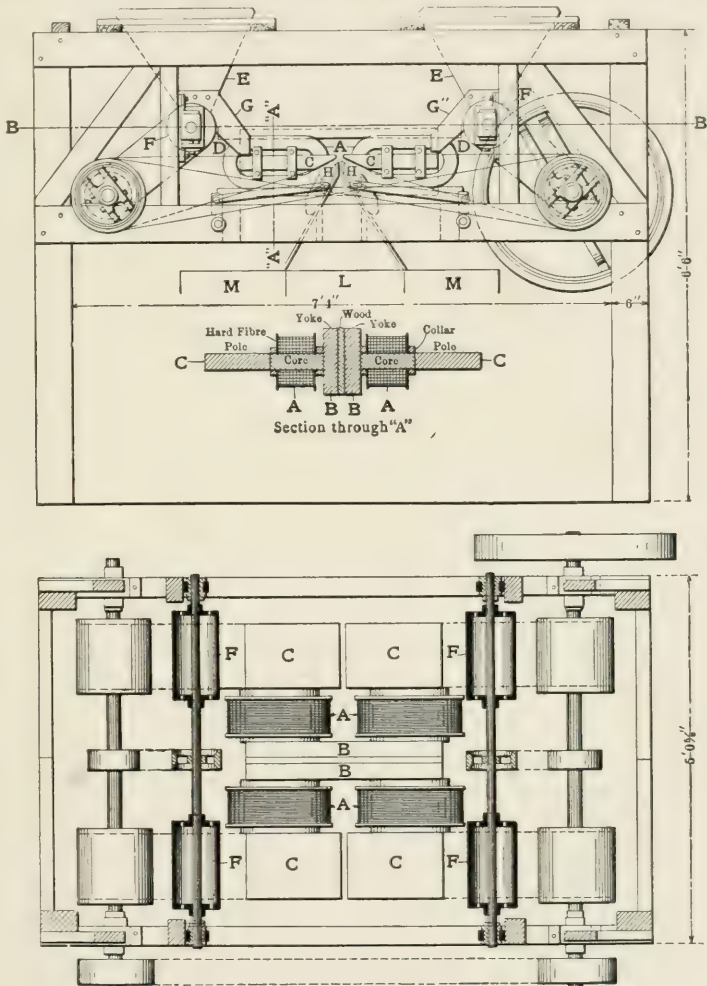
WETHERILL HORIZONTAL SEPARATOR.
